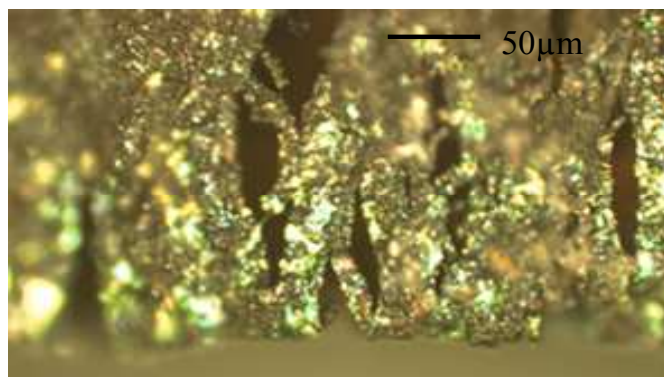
Optical micrographs showing the surface of an SMA actuator with recast-layer. Cracks formed upon cyclic loading in the recast-layer that caused early failure.
